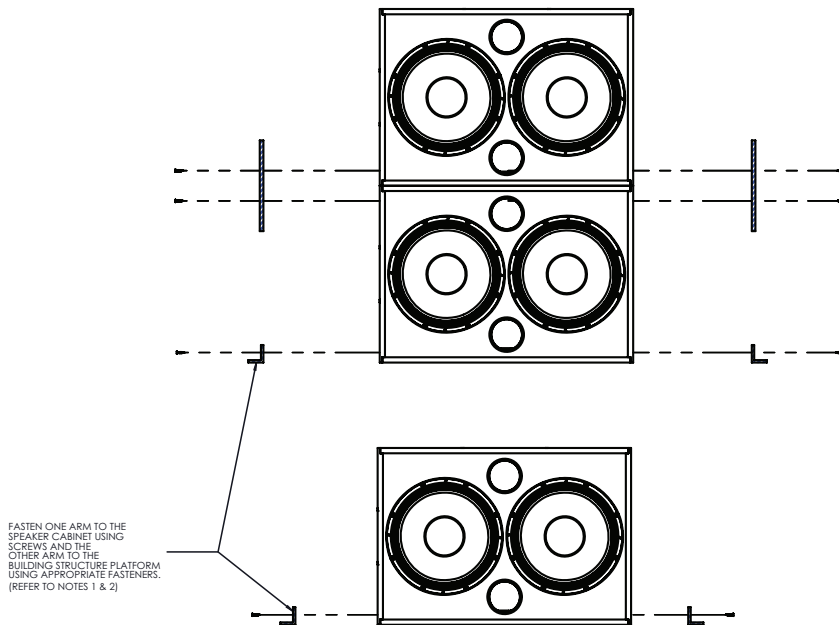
Anchor CSB215 Units Together (System 400A Only) and to Building Structure Platform (System 400A and System 300A)
